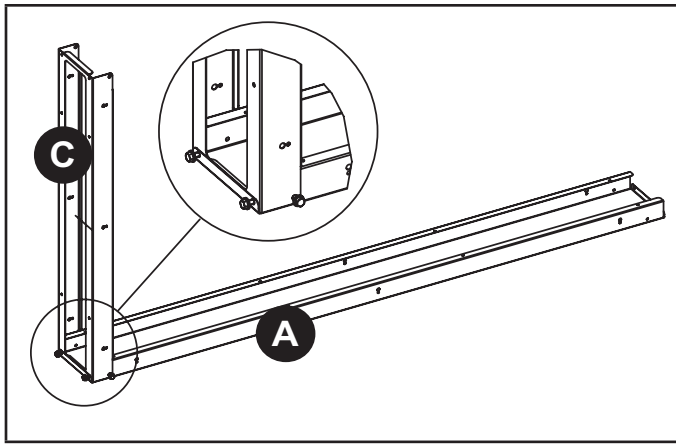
Assemble Front Panel (C) to Bottom Panel (A)
